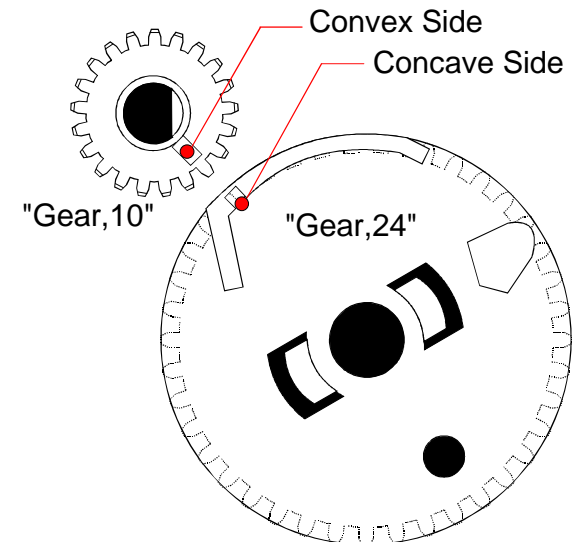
Matching Alignment of "Gear,10" and "Gear,24"
